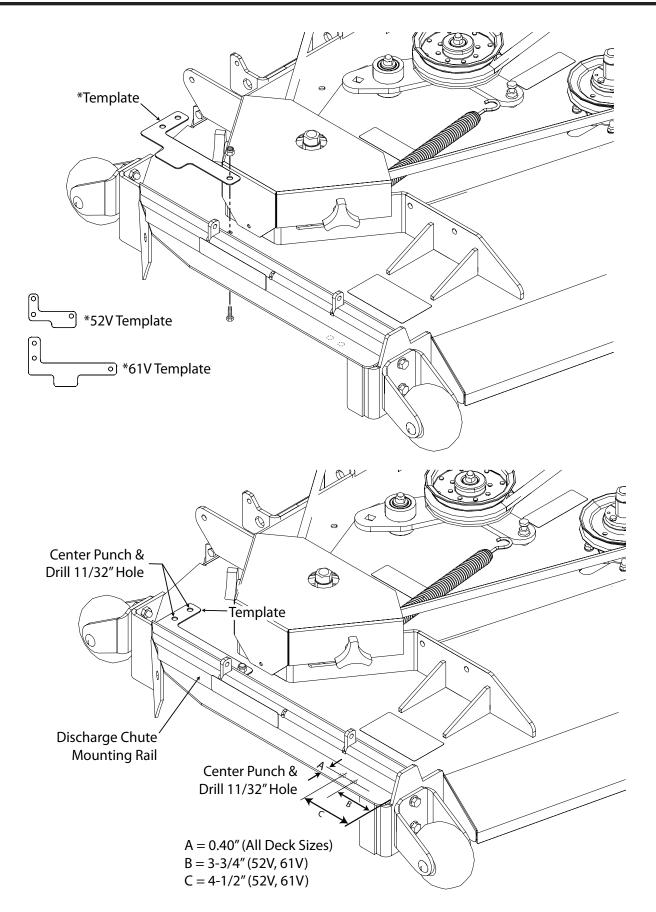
Locating and Drilling the Mounting Holes for STC-52V/61V
